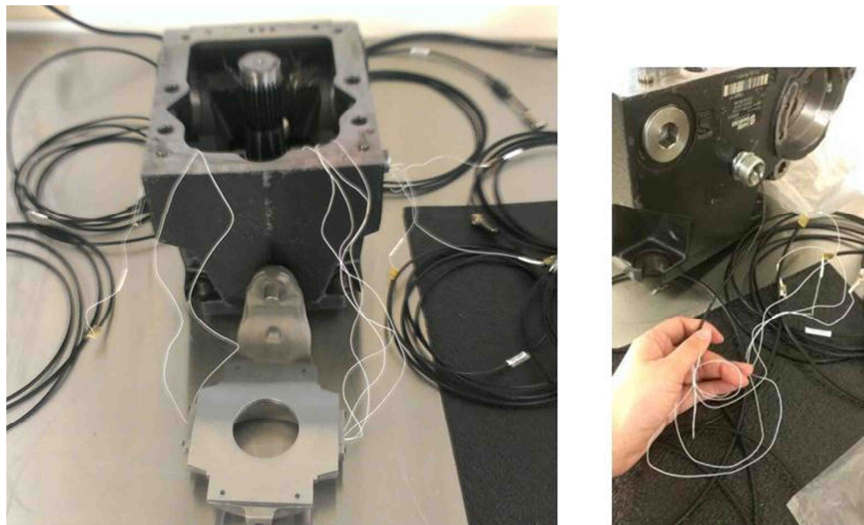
Assembled swashplate before being inserted into the pump housing.
